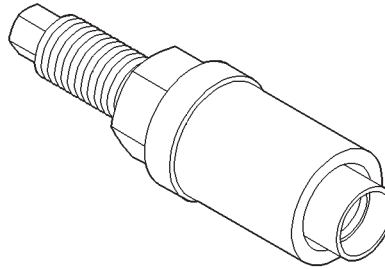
Crankshaft Sprocket Installer Tool 3718
